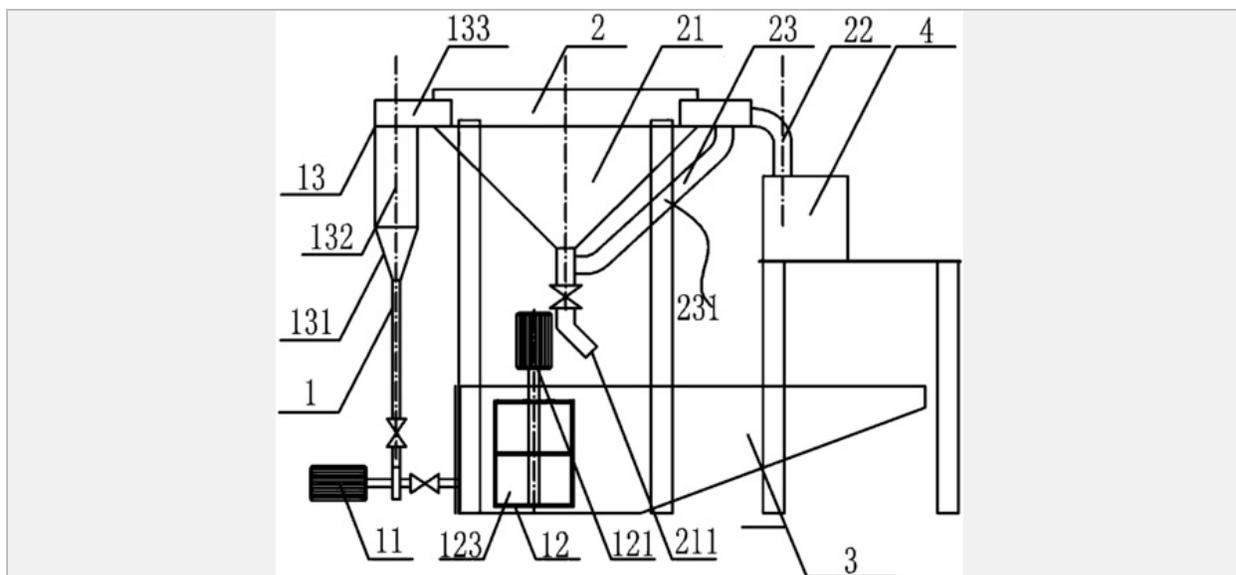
A palm husk-kernel separator disclosed in CN103386357 by Nantong Safe Machinery Equipment.
